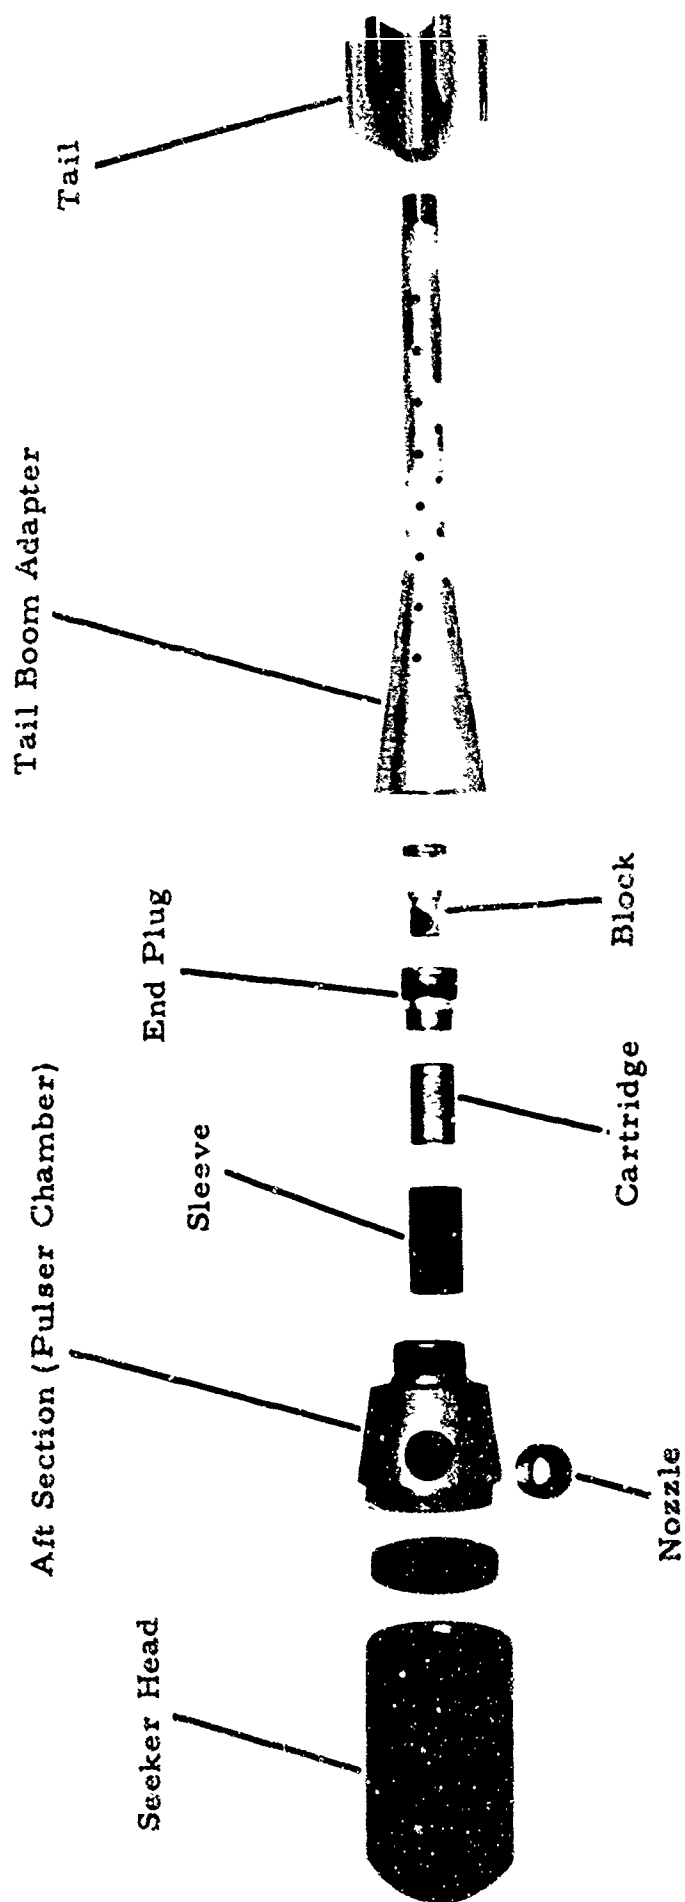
Test Projectile with Pulser - Exploded View
